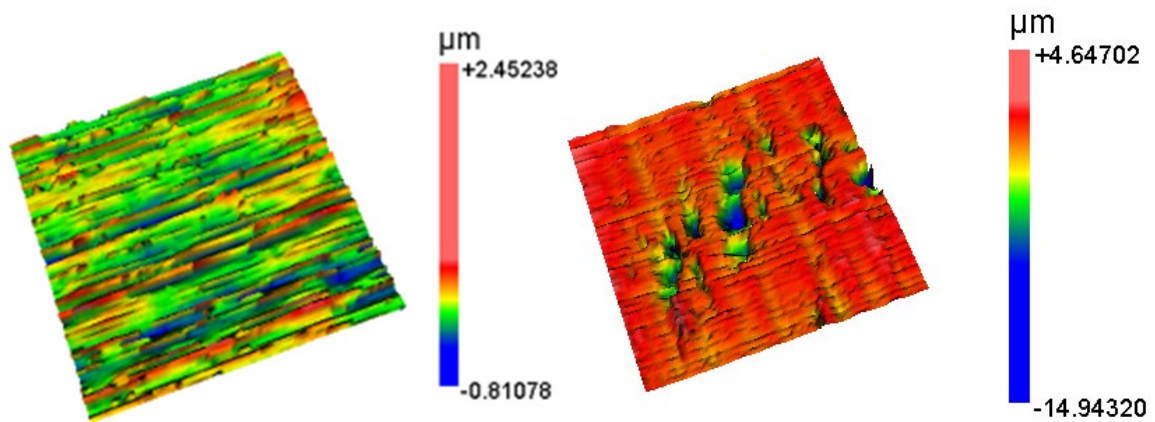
Sample 3D images for machined surfaces captured with Zygo3D profiler (a) ductile cut (b) brittle cut
